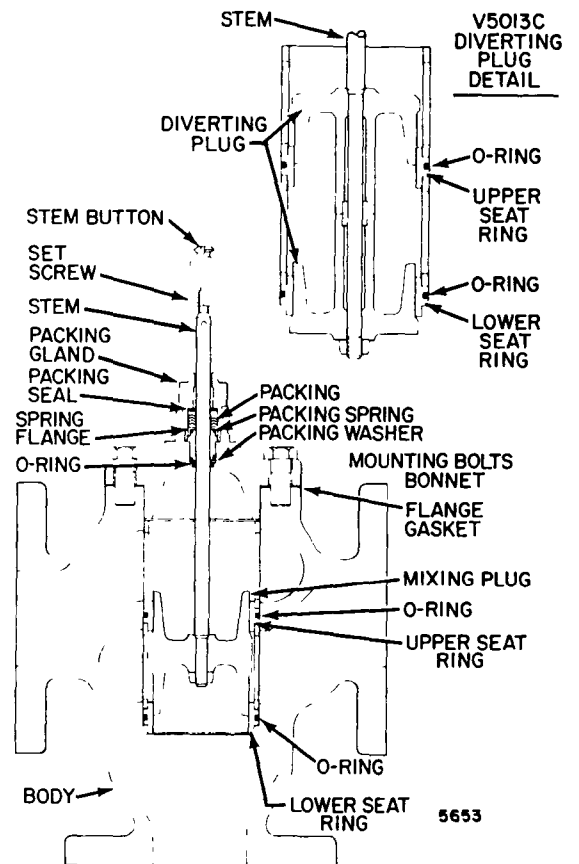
Cutaway of Typical V5013C and D Flanged Type Body and V5013C Diverting Plug
